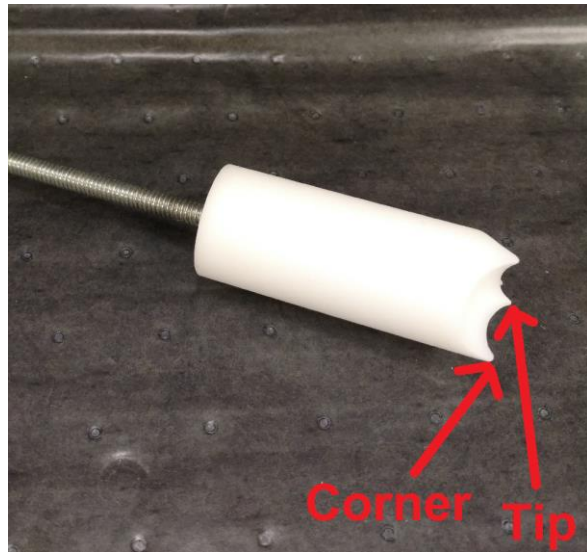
A CCSD valve mold with attached threaded rod with the valve center tip and valve corner labeled.
